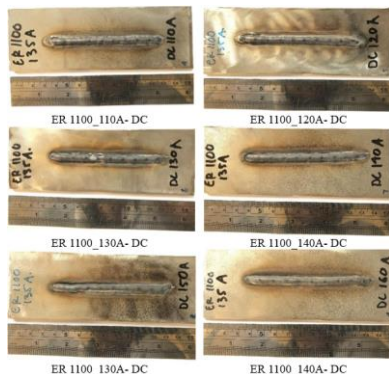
Second layer welding bead (110A to 160A) filler ER1100 with DC polarity.
